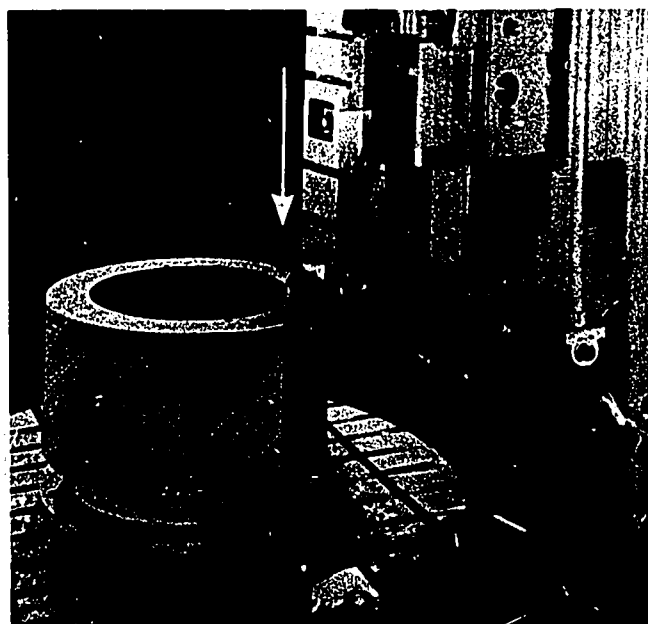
A second machine which uses a single-edge cutting tool is a vertical cutting slotter. Here a sleeve for a marine engine is being machined to shape. The material is being removed in the form of chips.
